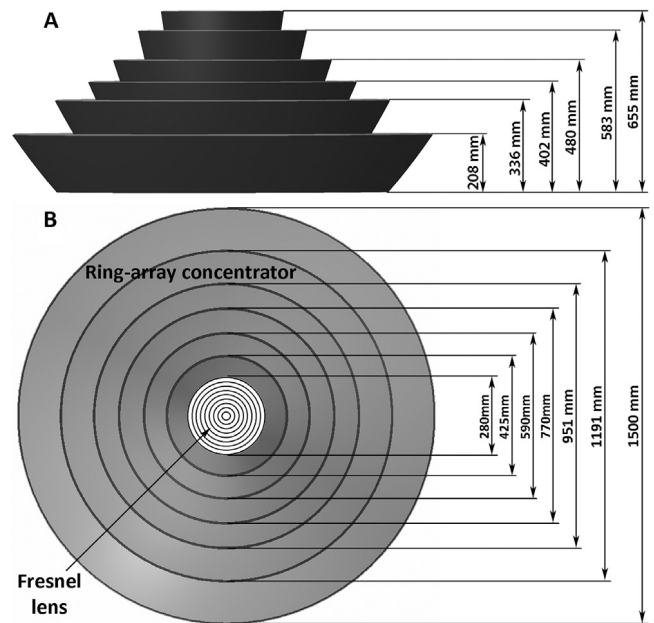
(A) Side view and (B) top view of the modified ring-array concentrator.
